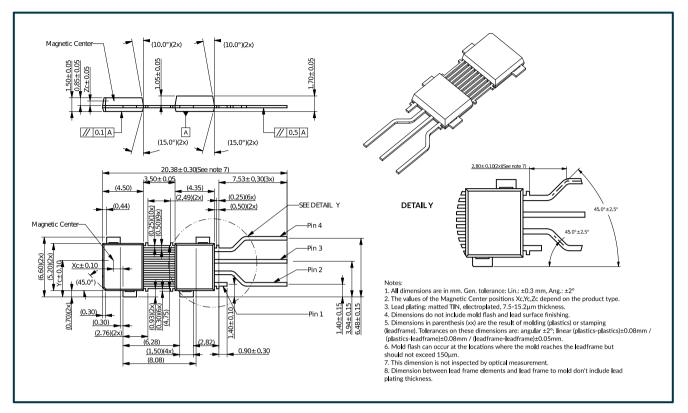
DMP-4 STD4 2.54 Package Outline Drawing
